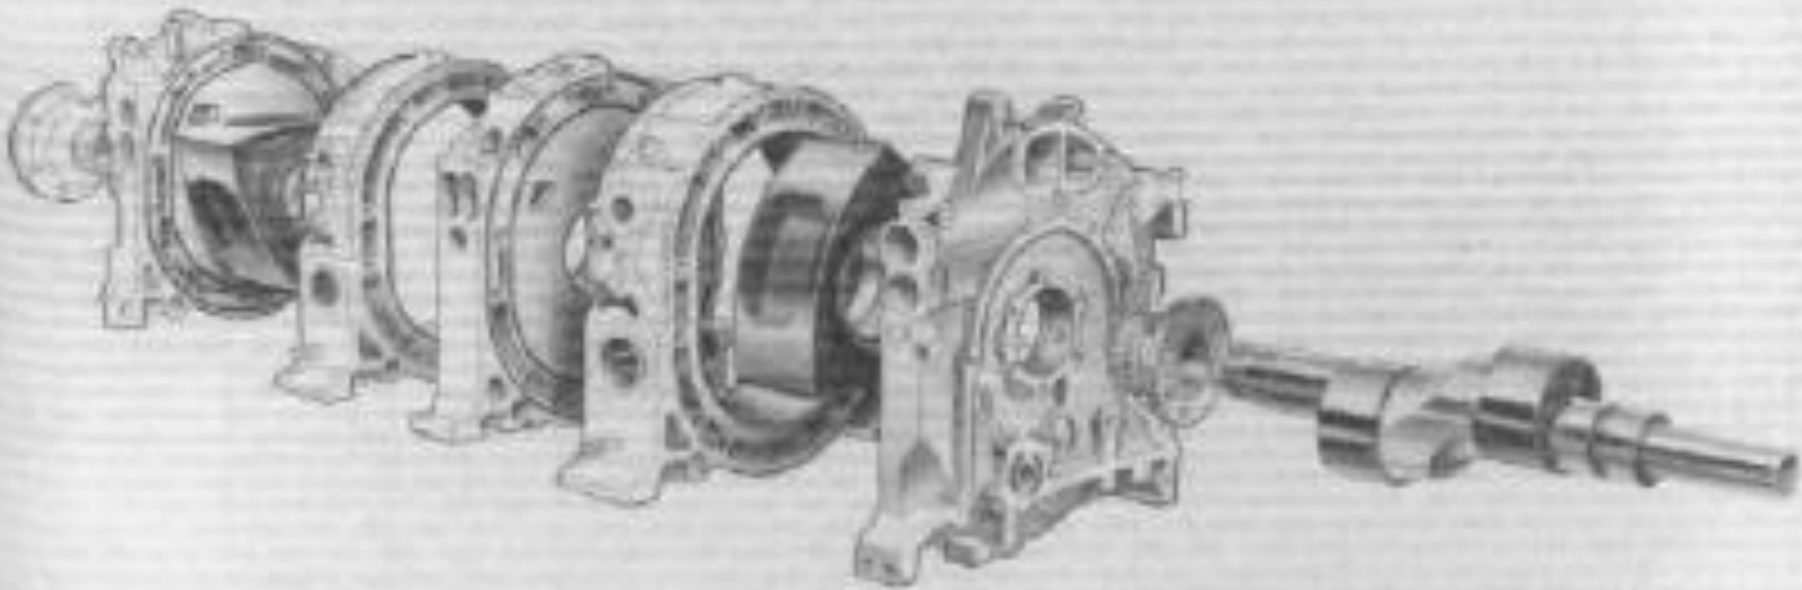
John Deere model 2034R engine components: Crankshaft and one of two counterweights. (Courtesy of John Deere Technologies International Inc., Rotary Engine Div., Wood-Ridge, N.J.)
